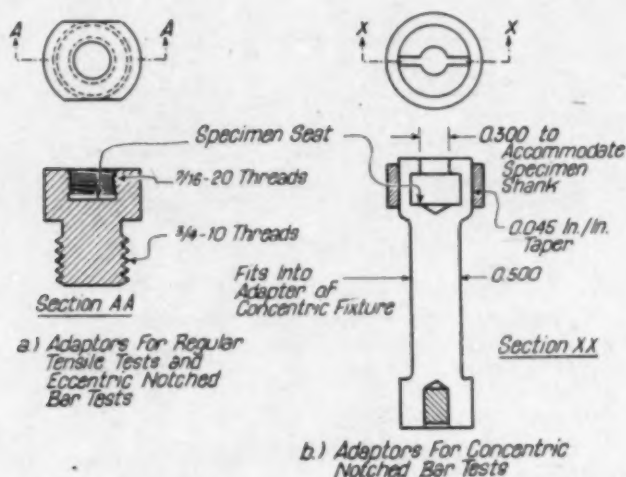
Adapters for Testing Small Specimens in the Fixtures for Standard Size Specimens.
